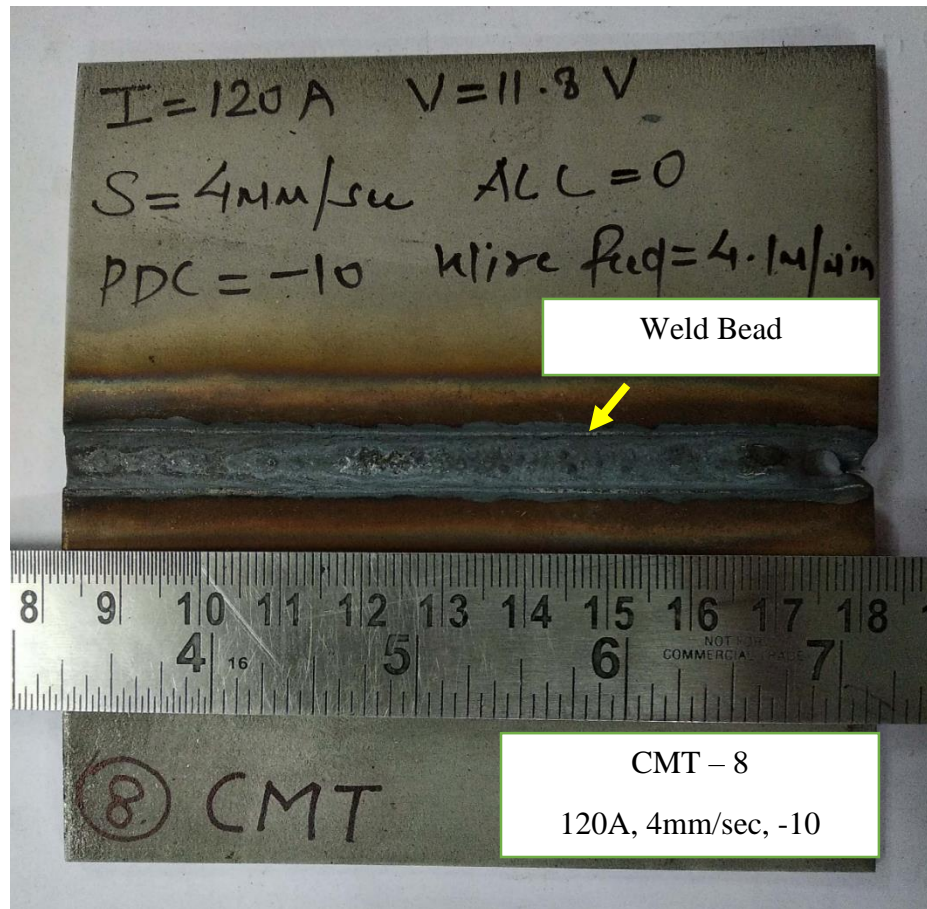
Image of CMT welded SS202 Sample 8 of thickness 1.58 mm
